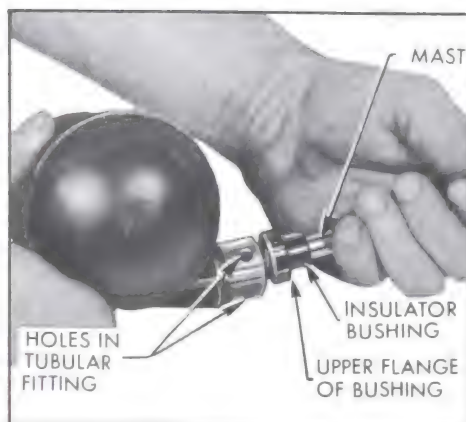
Removing and Installing Mast and Insulator Bushing
